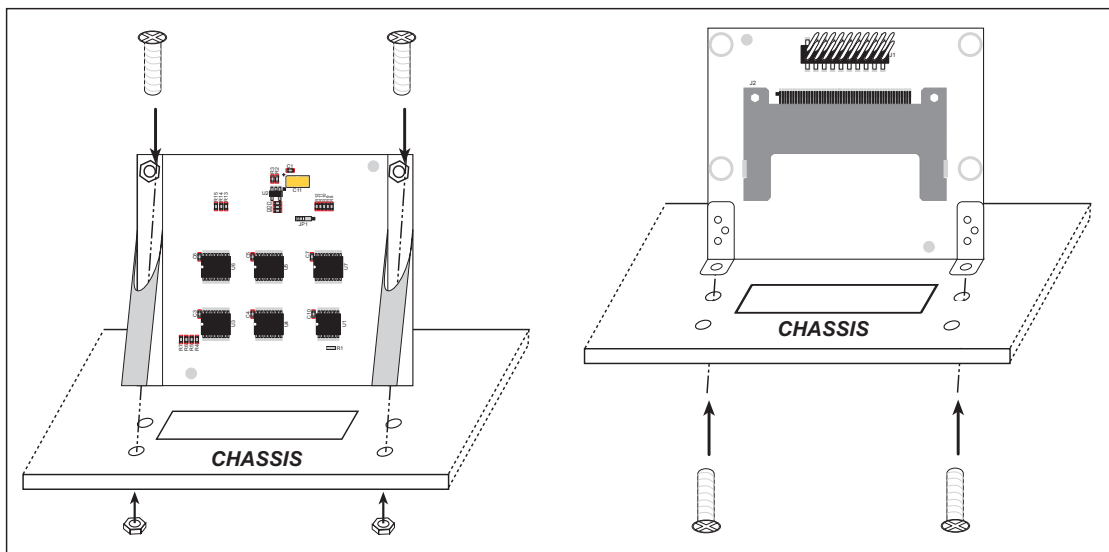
Panel Opening and Mounting Holes for Wi-Fi Board
